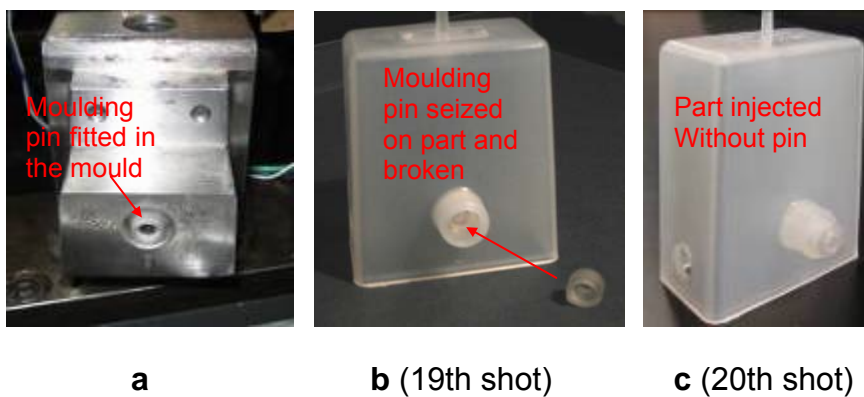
Moulding pin part zone when using the Somos 11120 pin: a) moulding pin fitted in the mould, b) and c) aspects of the failure of the pin when moulding PP
